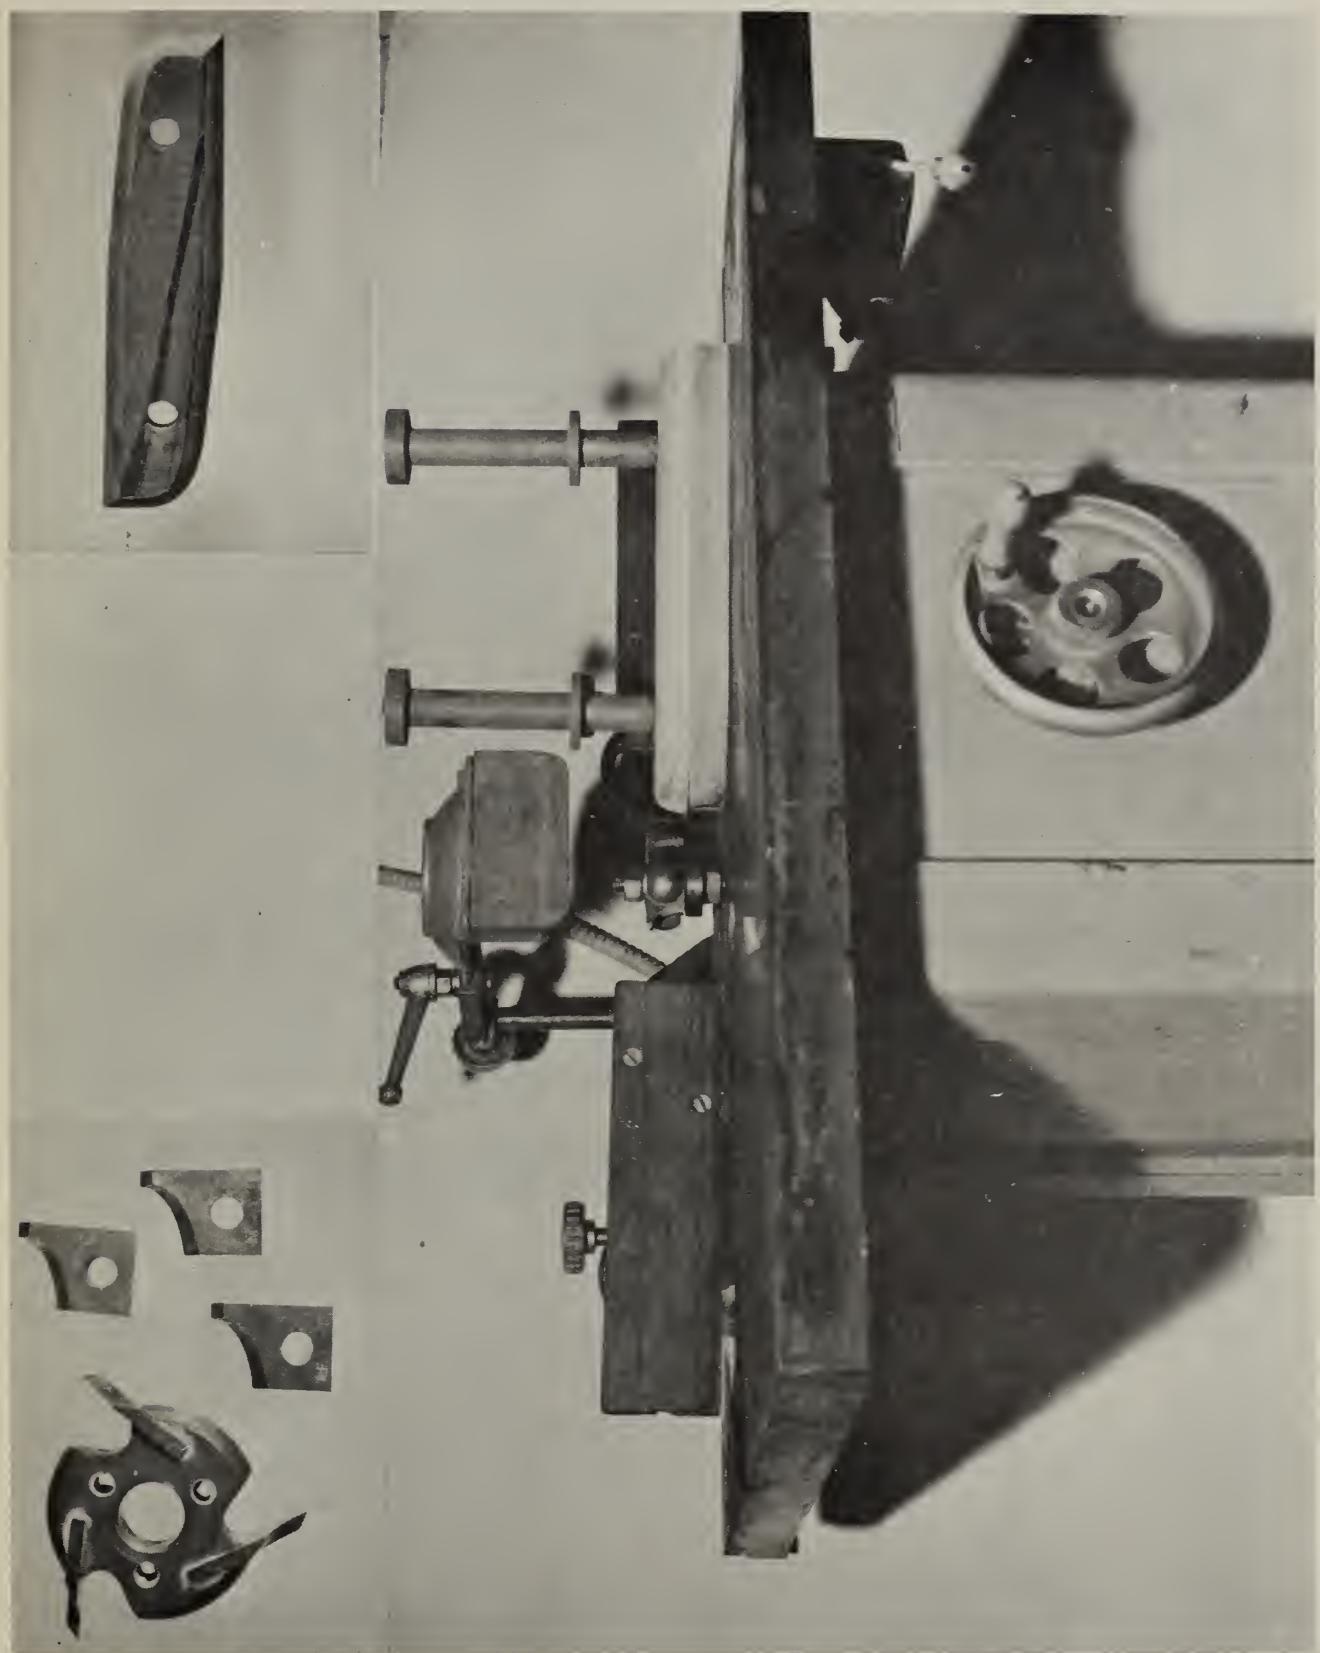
Single-spindle shaper and roughed out specimen mounted in jig.
